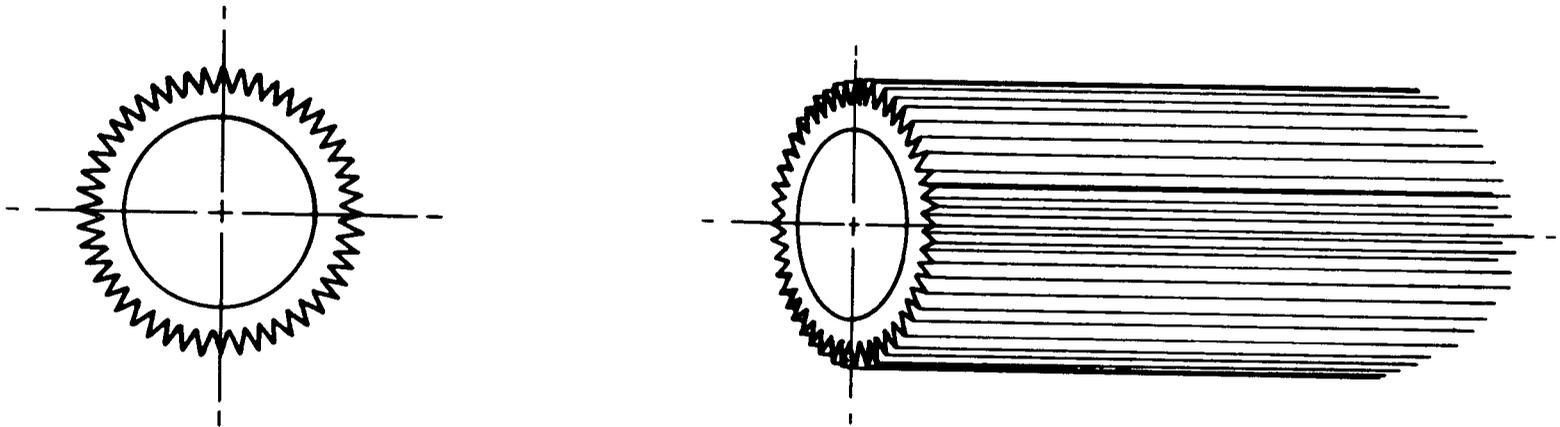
$\frac{3}{8}$ in. O.D. Serrated Tube
